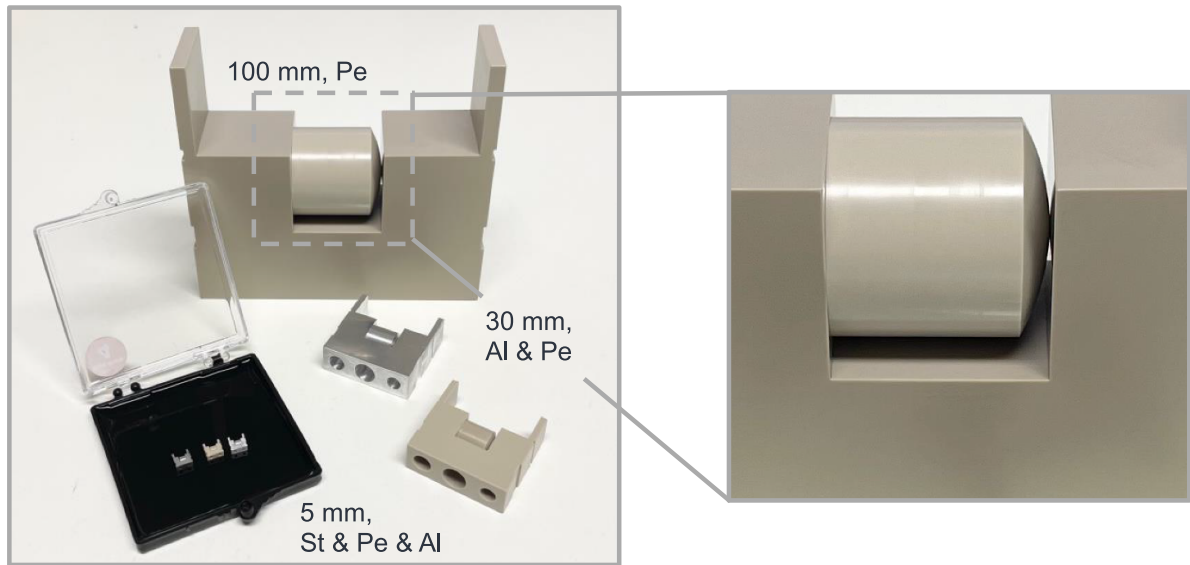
Photograph of the manufactured test parts and a magnified view of the insert used for calculating a resolution parameter.
